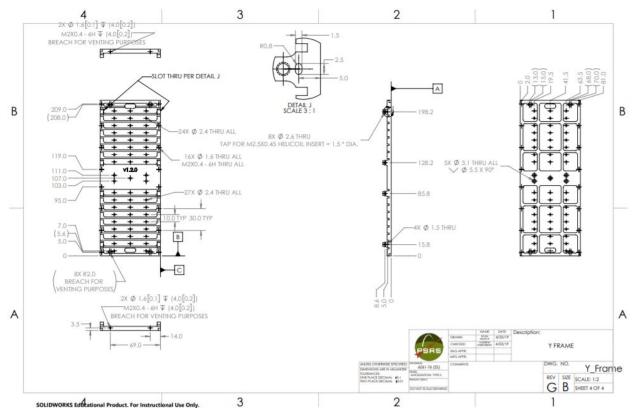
3 of 3 Dimensioned Drawing of the Y OreSat Frame
